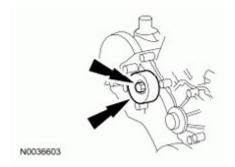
Locating Accessory Drive Belt Idler Pulley And Bolt Courtesy of FORD MOTOR CO.
